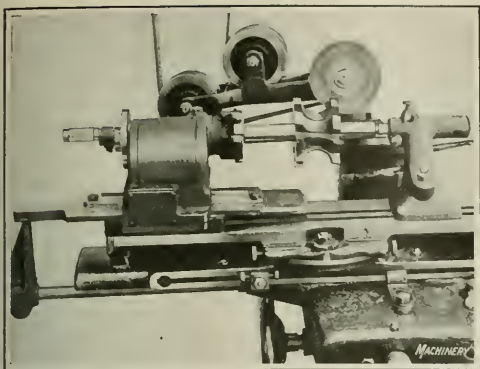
"Curvex" Cutter and Hob Grinding Attachment made by the R. K. LeBlond Machine Tool Co.
